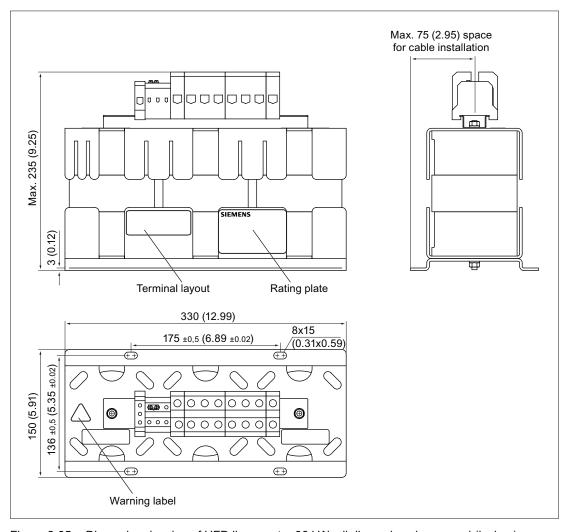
Dimension drawing of HFD line reactor 36 kW, all dimensions in mm and (inches)
